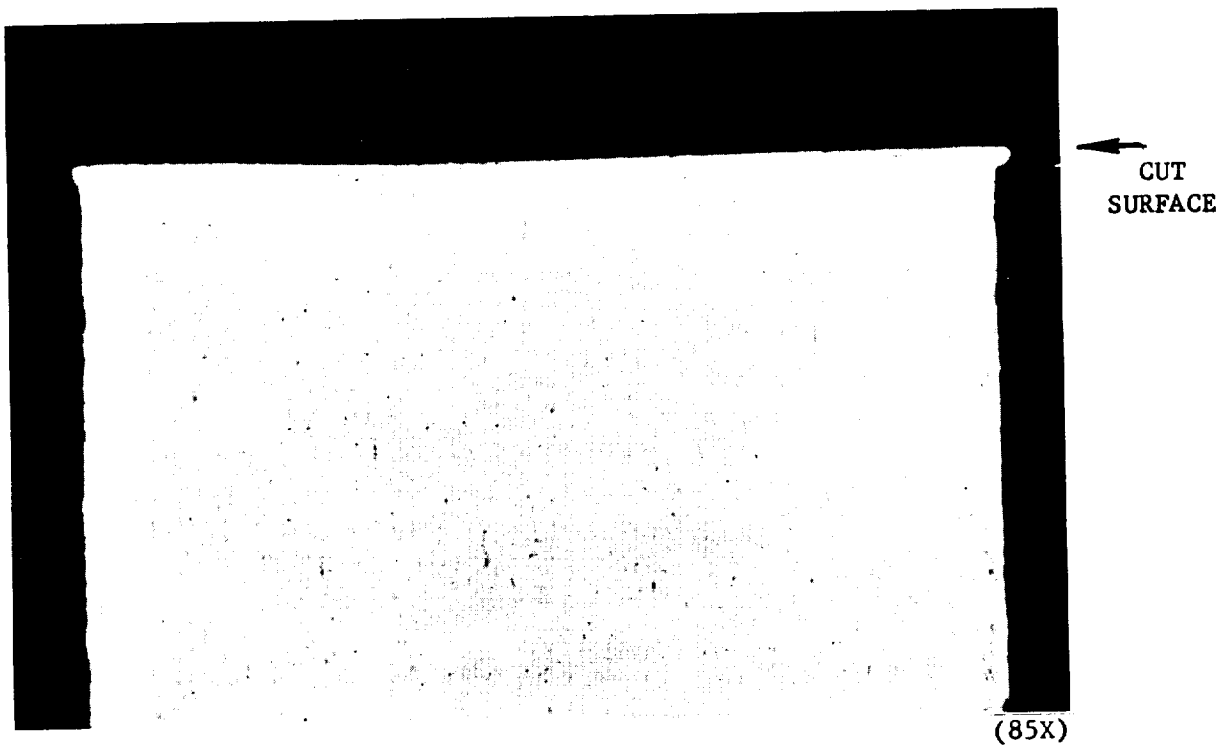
CROSS-SECTION OF SURFACE CUT DRY ON ABRASIVE WHEEL.
